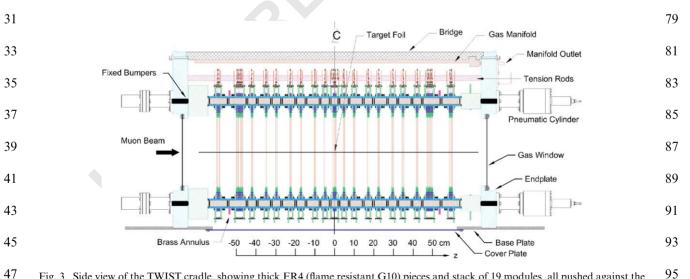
Side view of the TWIST cradle, showing thick FR4 (flame resistant G10) pieces and stack of 19 modules, all pushed against the upstream cradle endplate by four pneumatic cylinders.
